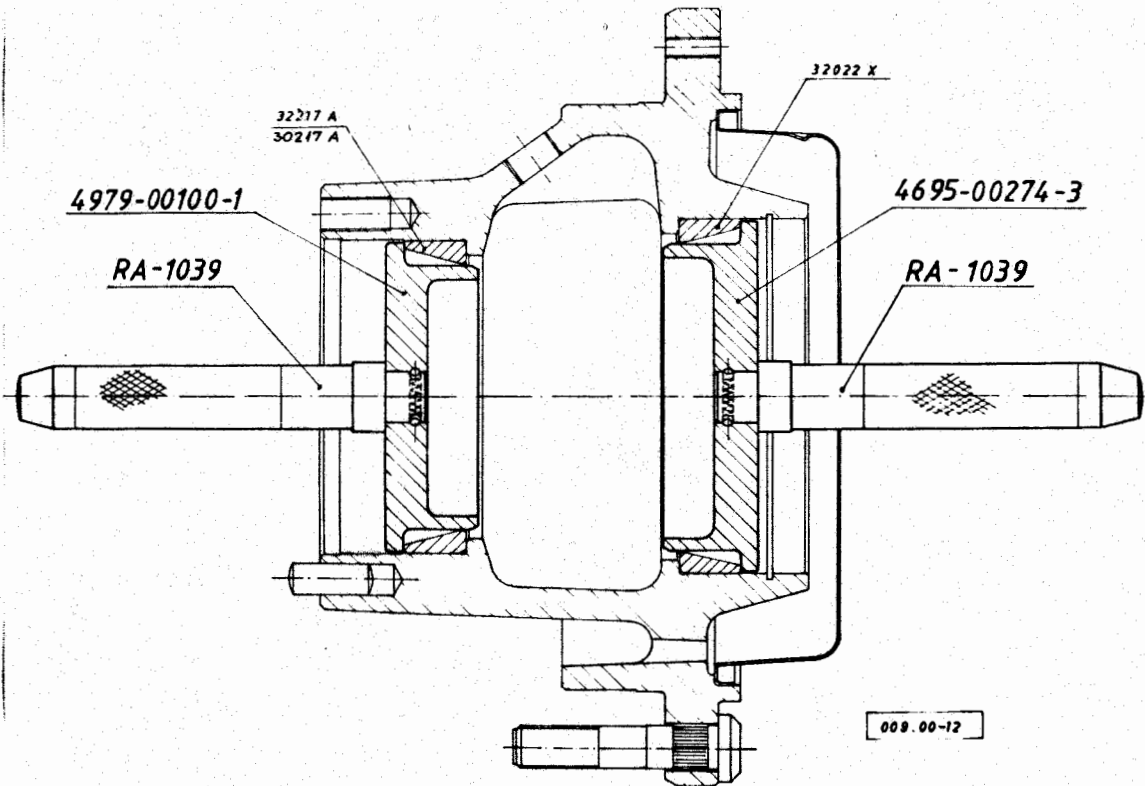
DRIVING OUT THE OUTER RACE OF THE INNER TAPER ROLLER BEARING
